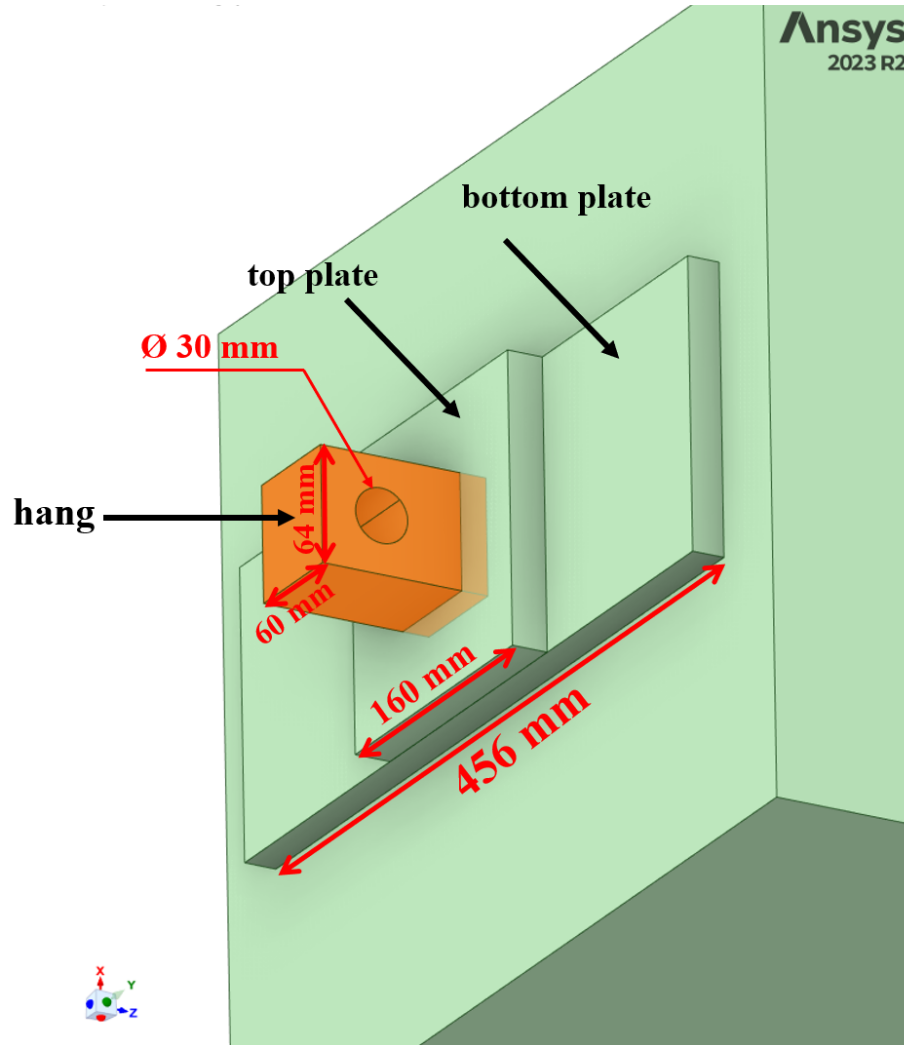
QF horizontal lifting left component design. Height of the hang is 95 mm. Height of the top plate is 20 mm and bottom plate is 18 mm.
